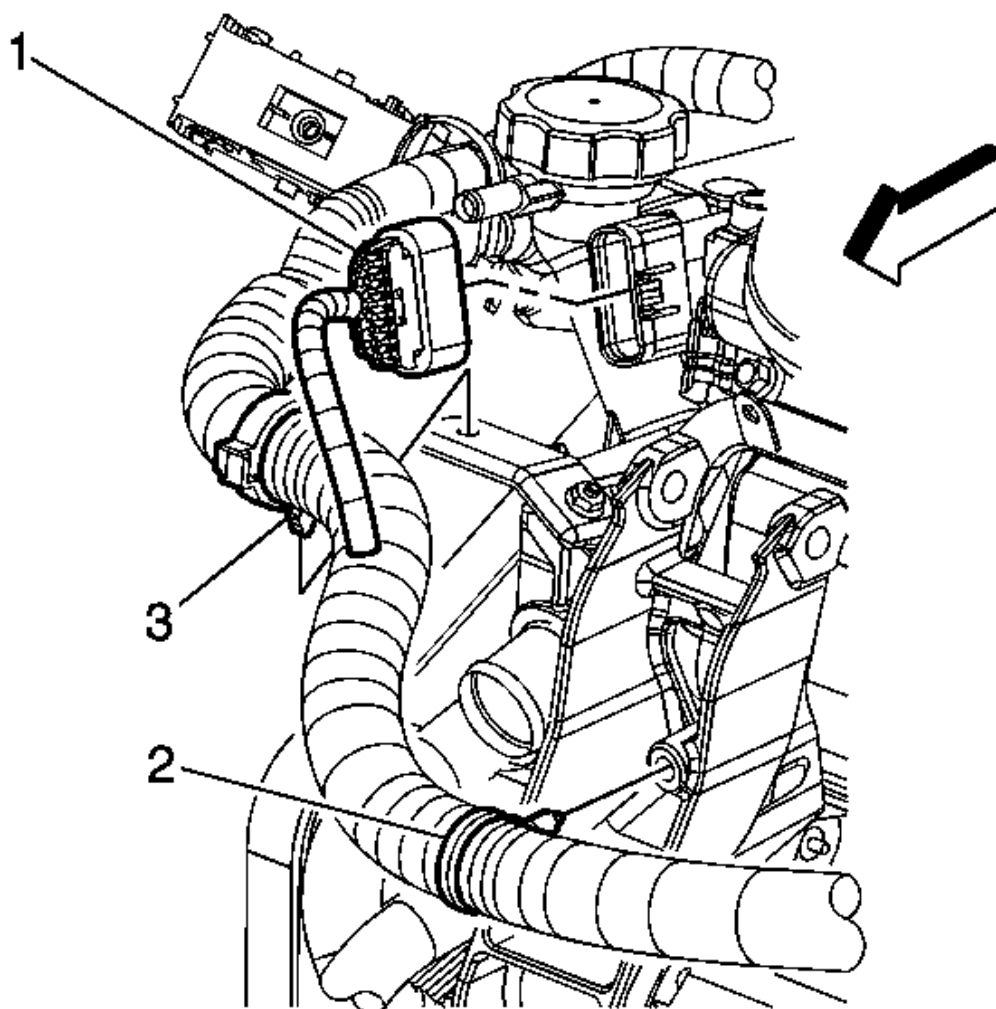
Identifying Engine Harness Clip & Strut Bracket
